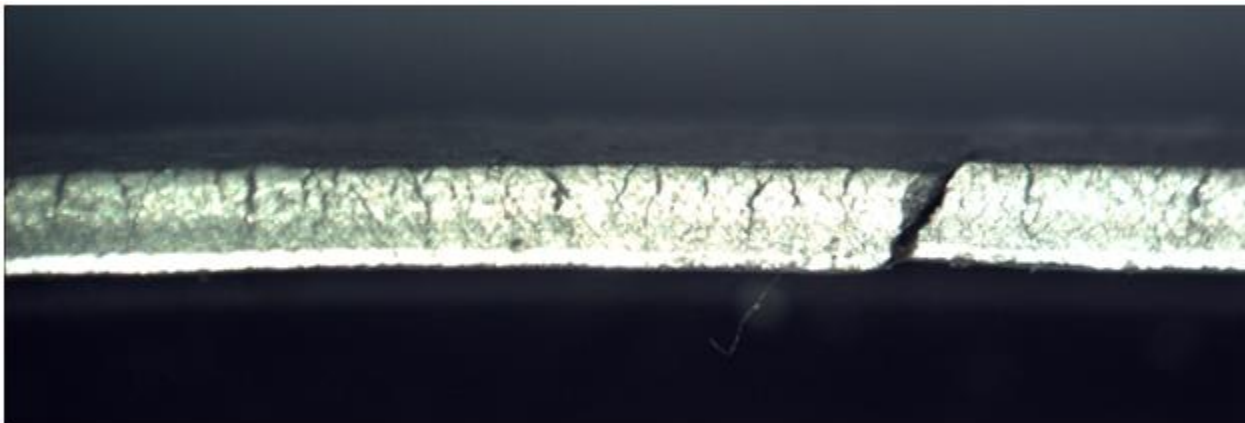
Typical edge crack phenomenon of steel sheet from Supplier 2, DP780 EG 1.4
